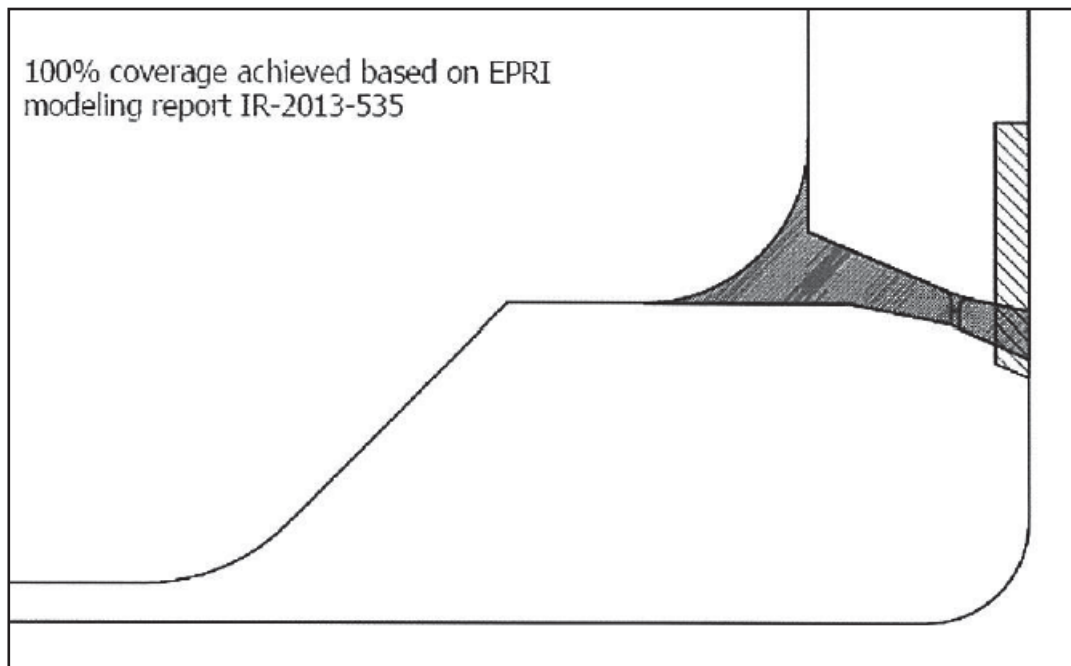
Weld N3D-NV, Lower 15% Coverage
